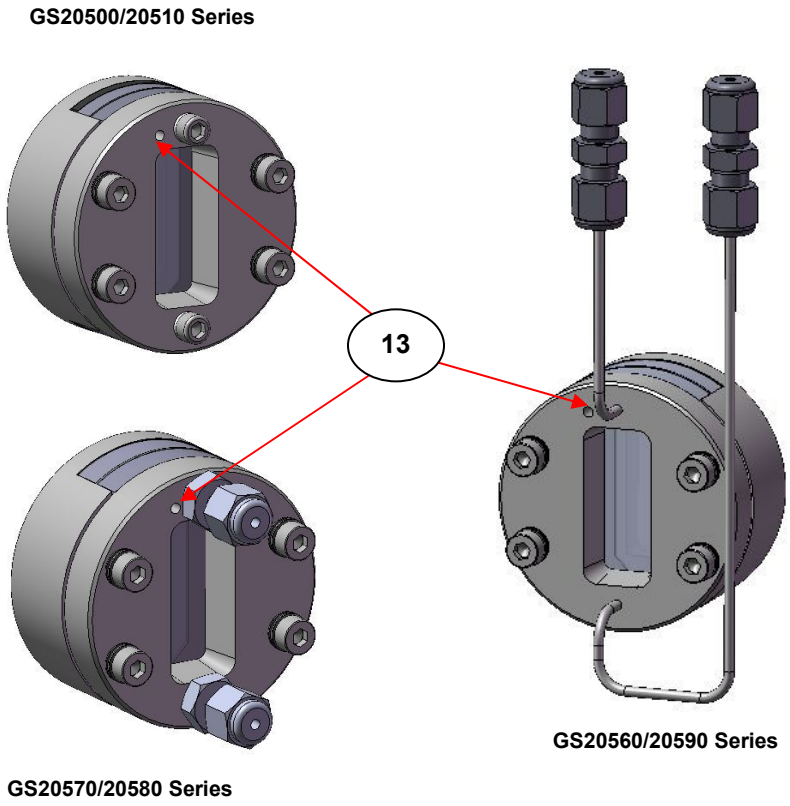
Position of Thermocouple Well Hole on the Liquid Sample Cell Series Types
